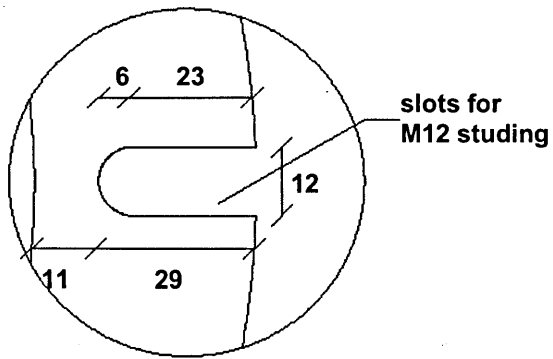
Plan view of slot for clamping bolts and holding down (all dimensions in mm, not to scale)
